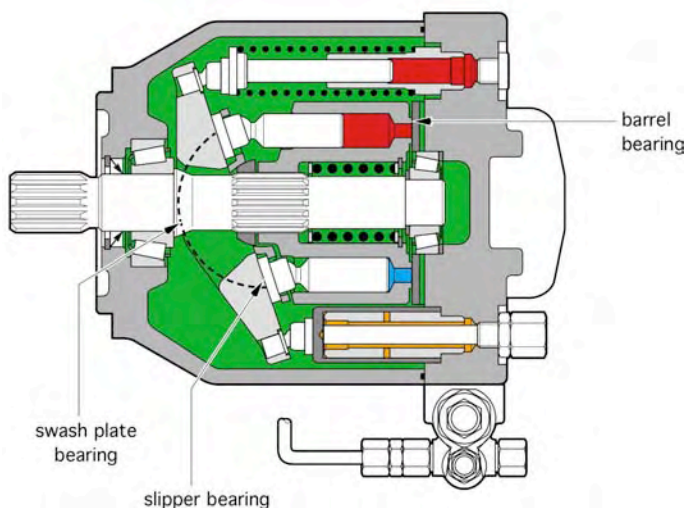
hydrostatic bearings in an axial piston slipper type pump
